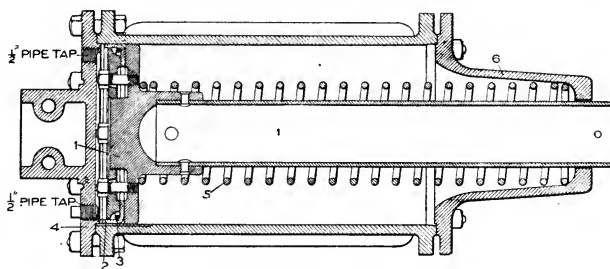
Brake-Cylinder of Hollow-Rod Type.
